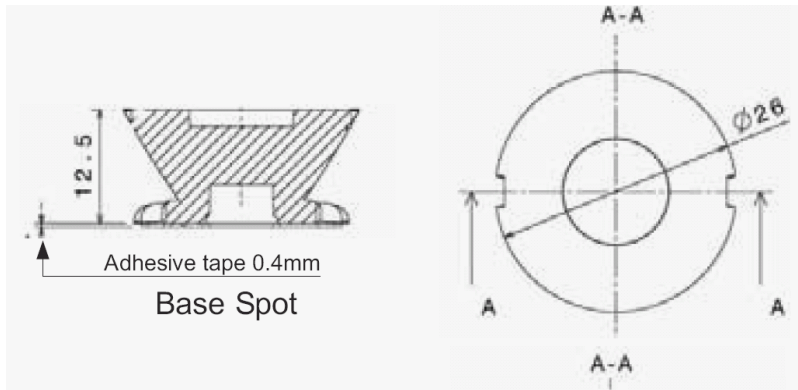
Mechanical drawing for Dialight OPTX1006
